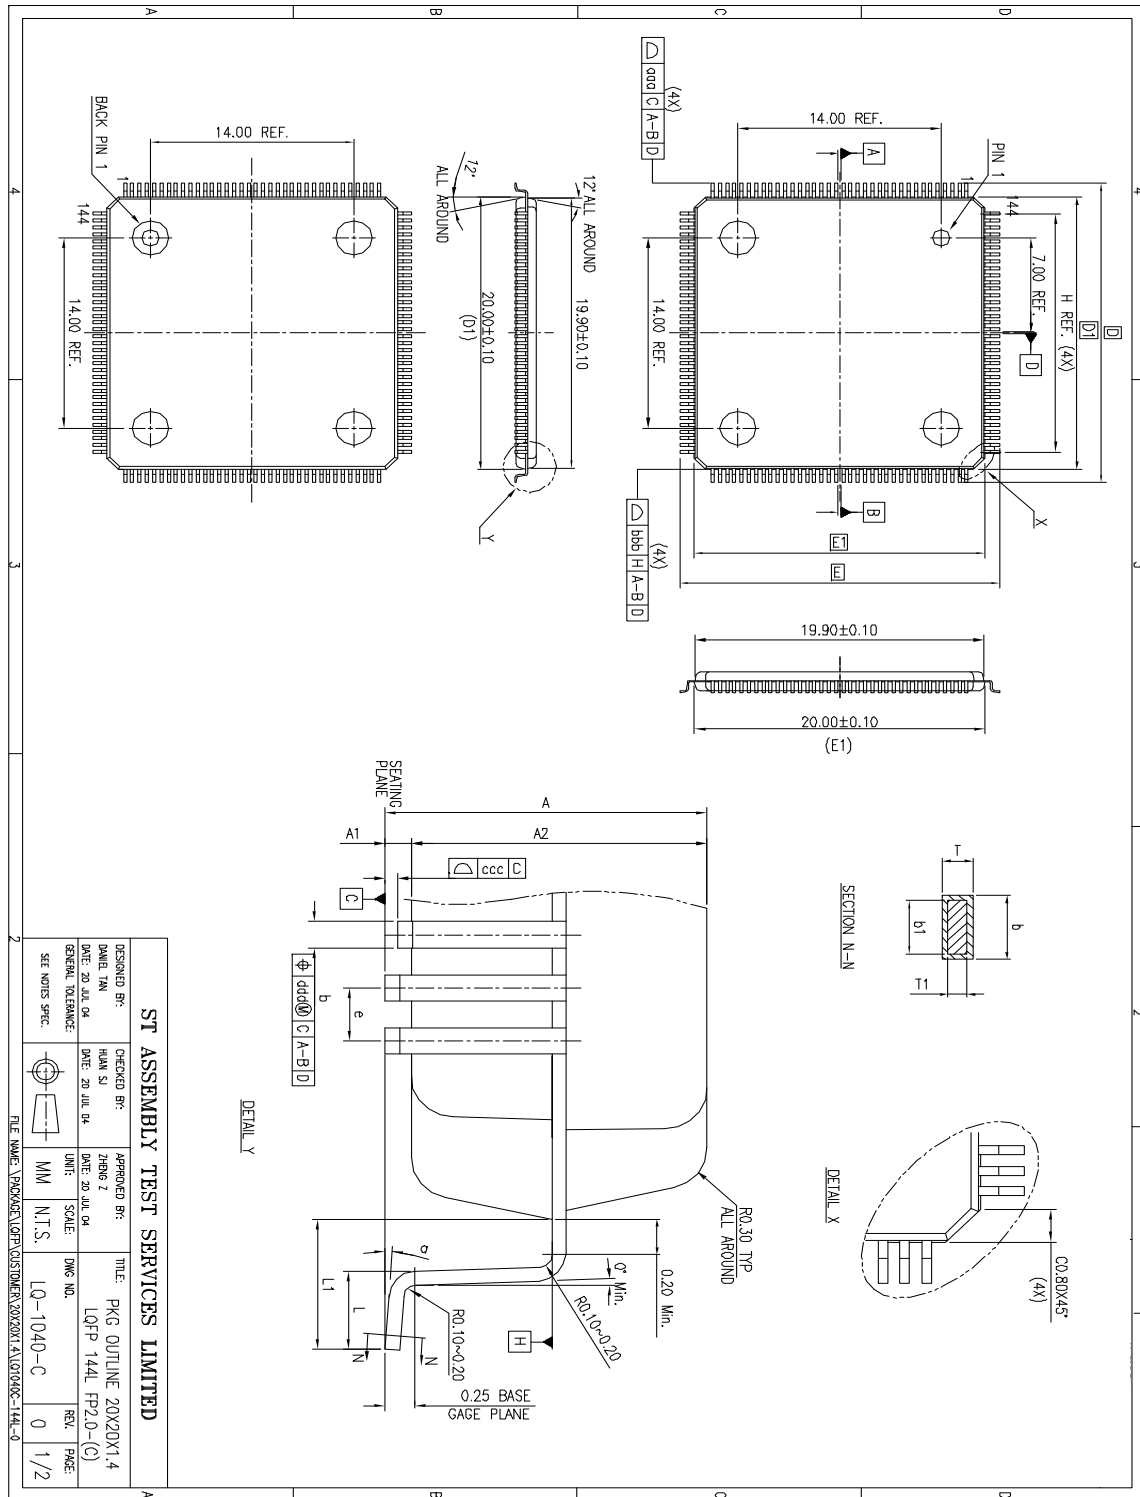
144-Pin Package Outline Drawing (1 of 2)
